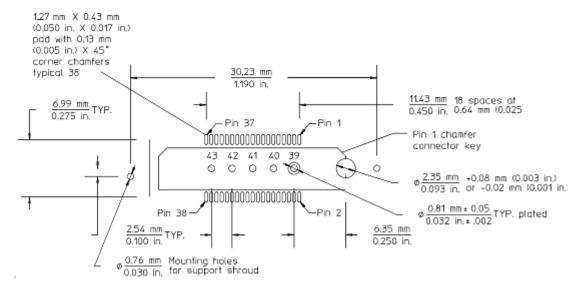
38-pin MICTOR connector footprint and support shroud mounting hole dimensions
